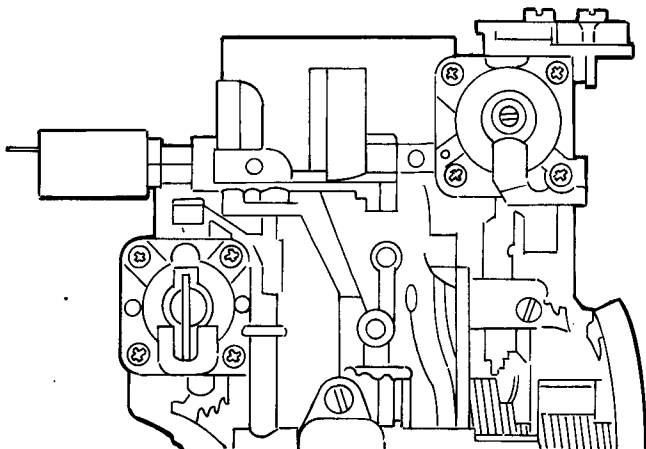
Solex Z2 carburettor (Sec 1)
